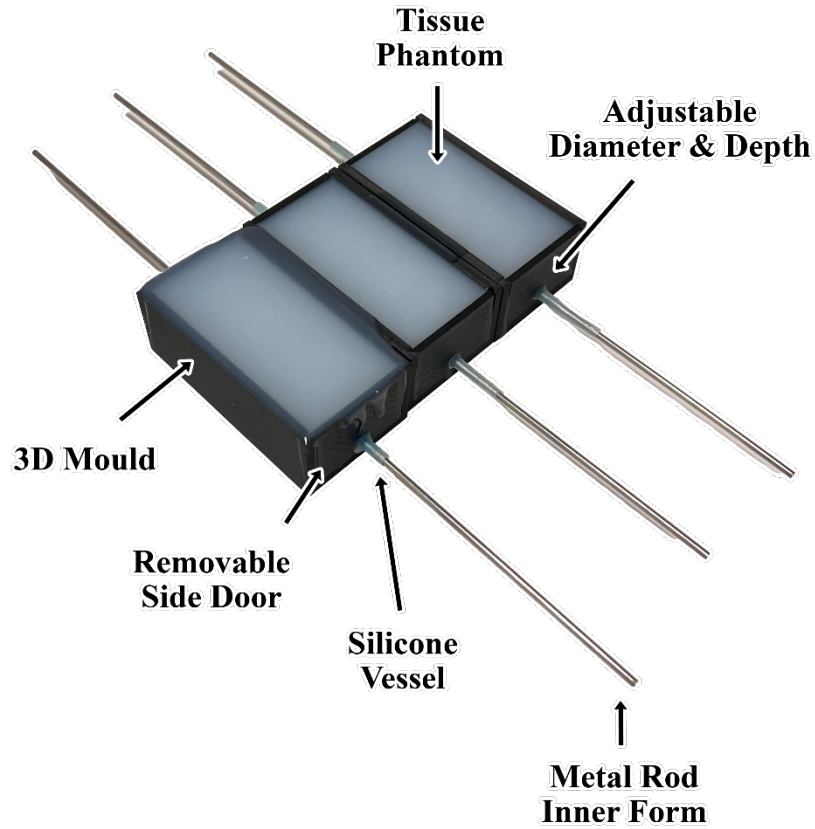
Tissue phantoms setting inside 3D moulds, with silicone vessels supported by inner metal rod forms.
